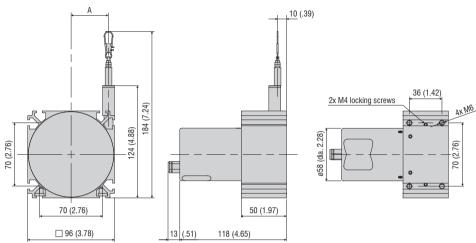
Dimensional drawing WDS- ... - P96 - CA - P, dimensions in mm (inches, rounded-off)
